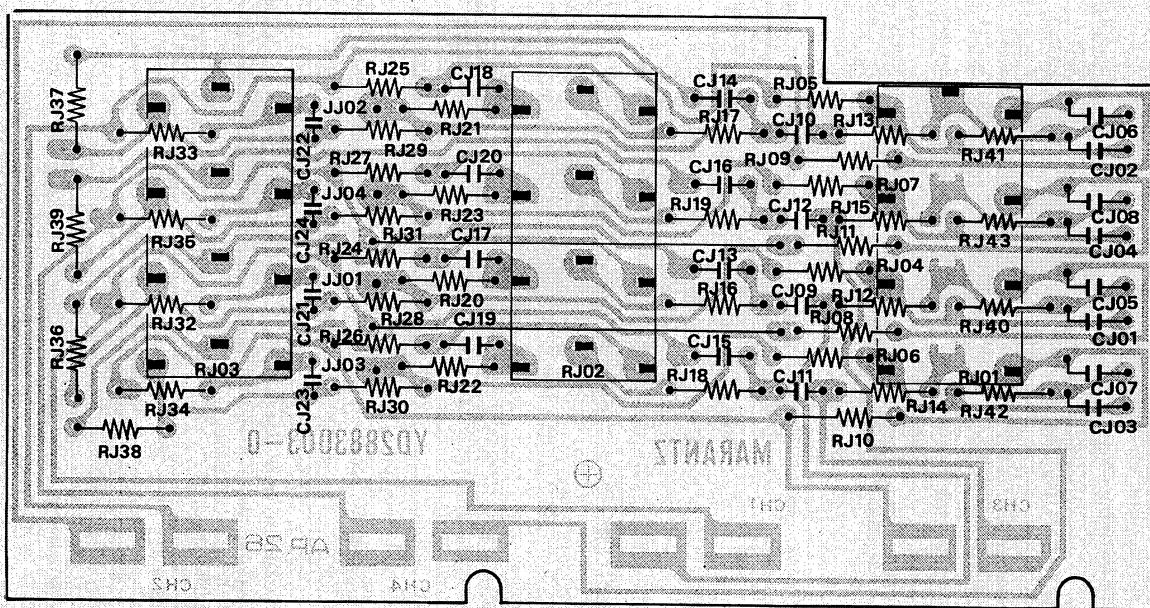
Tone Control Unit Assembly PJ01 Component Locations
